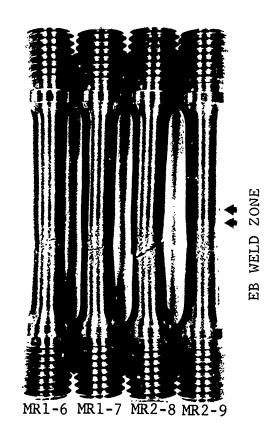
FAILED TENSILE SPECIMENS FROM MURDOCK EB WELDED PLATE
